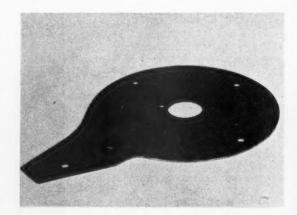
Stainless steel flat cam cut on Research Engineers machine. Maximum diameter: 10½". Thickness: 3/32".
